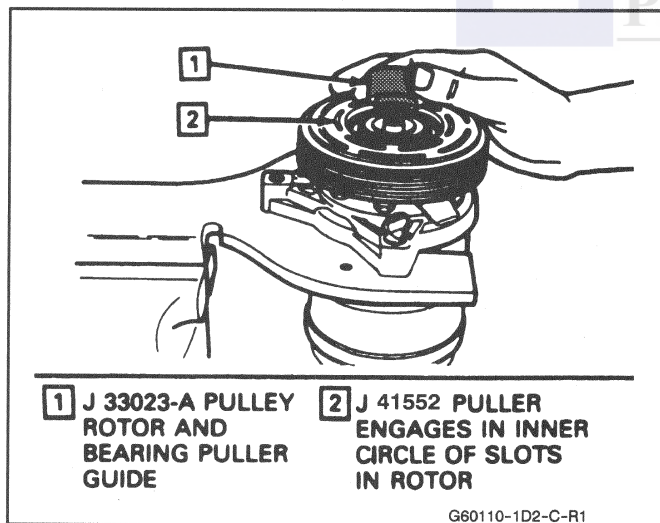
Installing Pulley Rotor/Bearing Puller Guide
